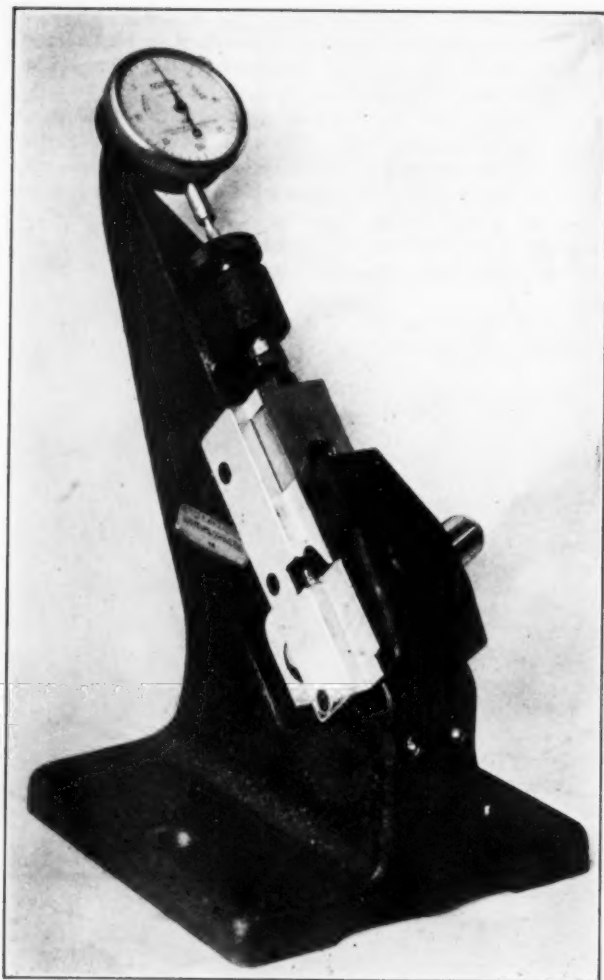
SETTING THE CUTTING BLADE TO LENGTH IN FIXTURE
